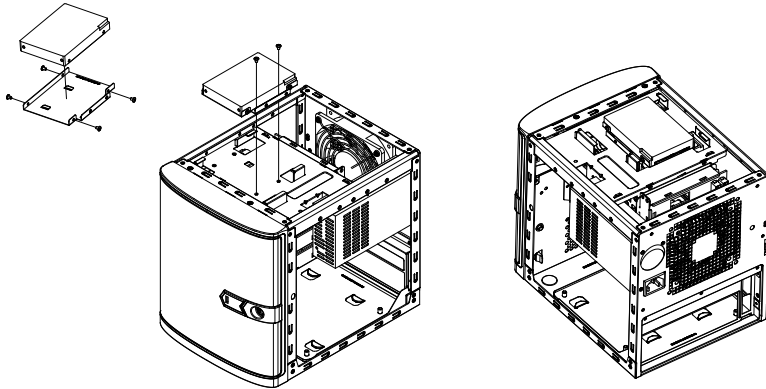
Installing the Top Mounted Fixed Hard Drive
